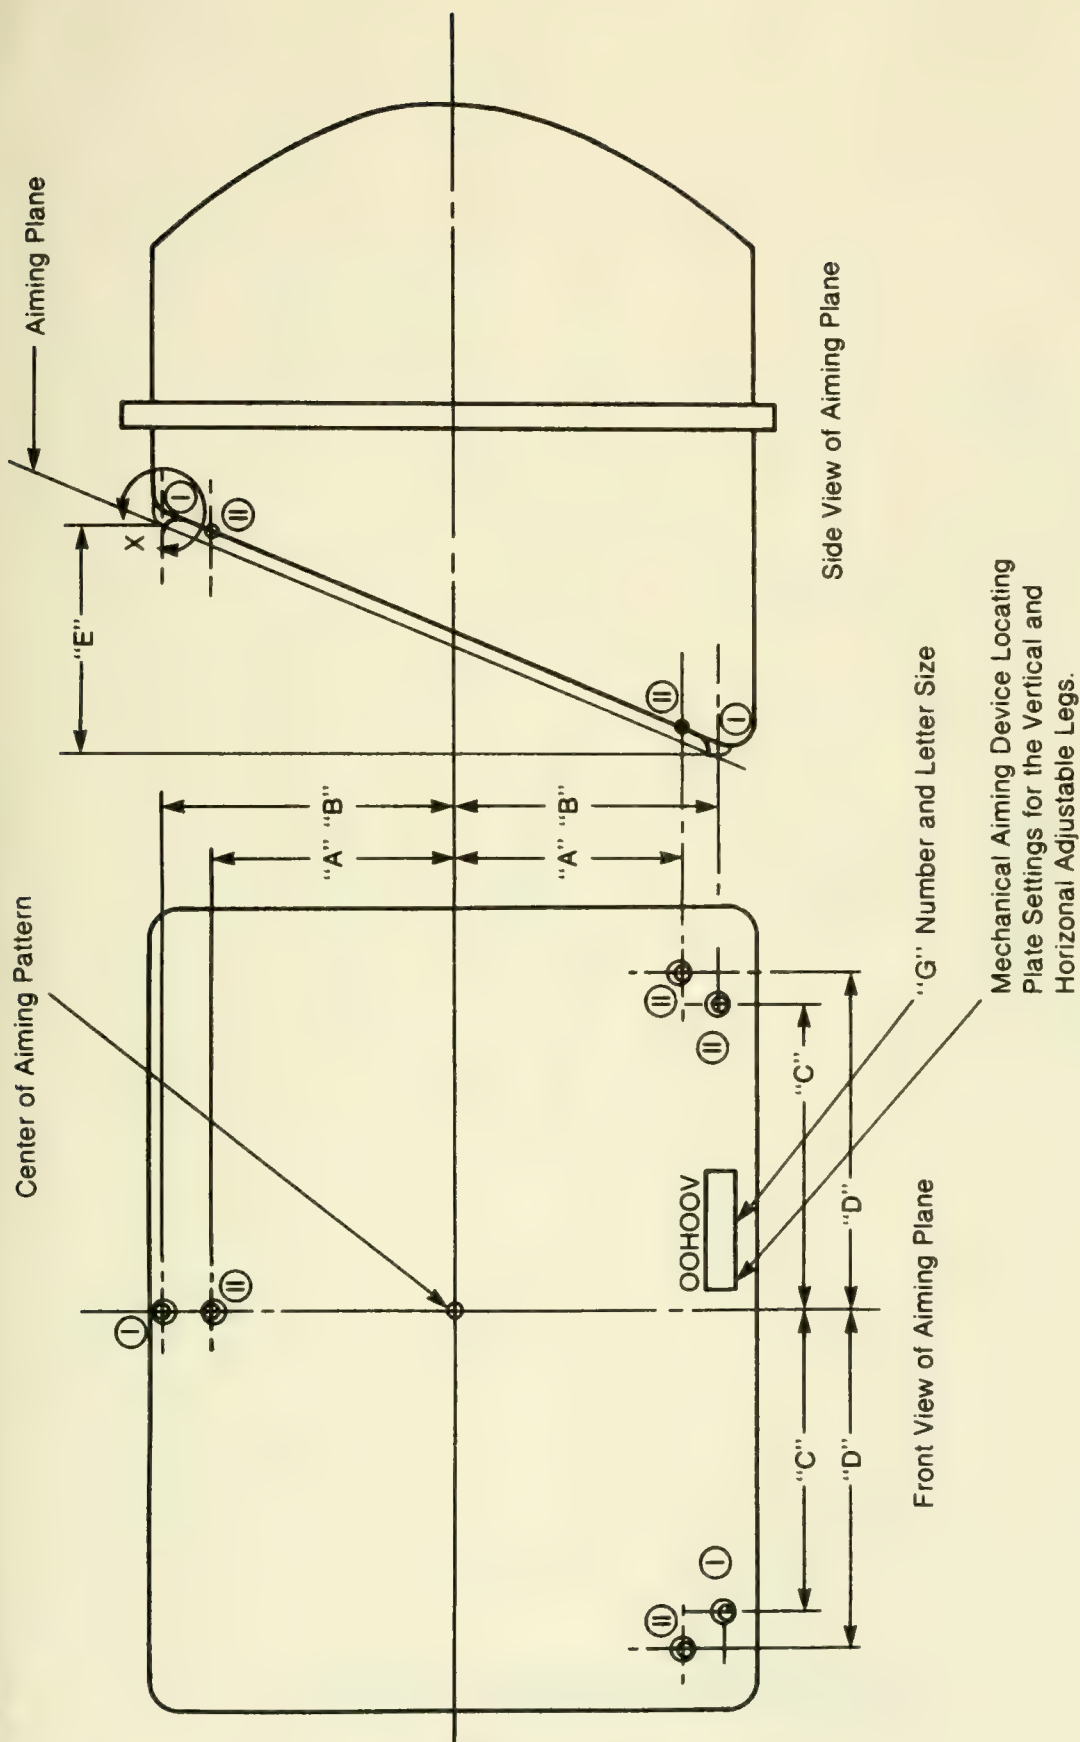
Dimensional Specifications for Location of Aiming Pads on Replaceable Bulb Headlamp Units
